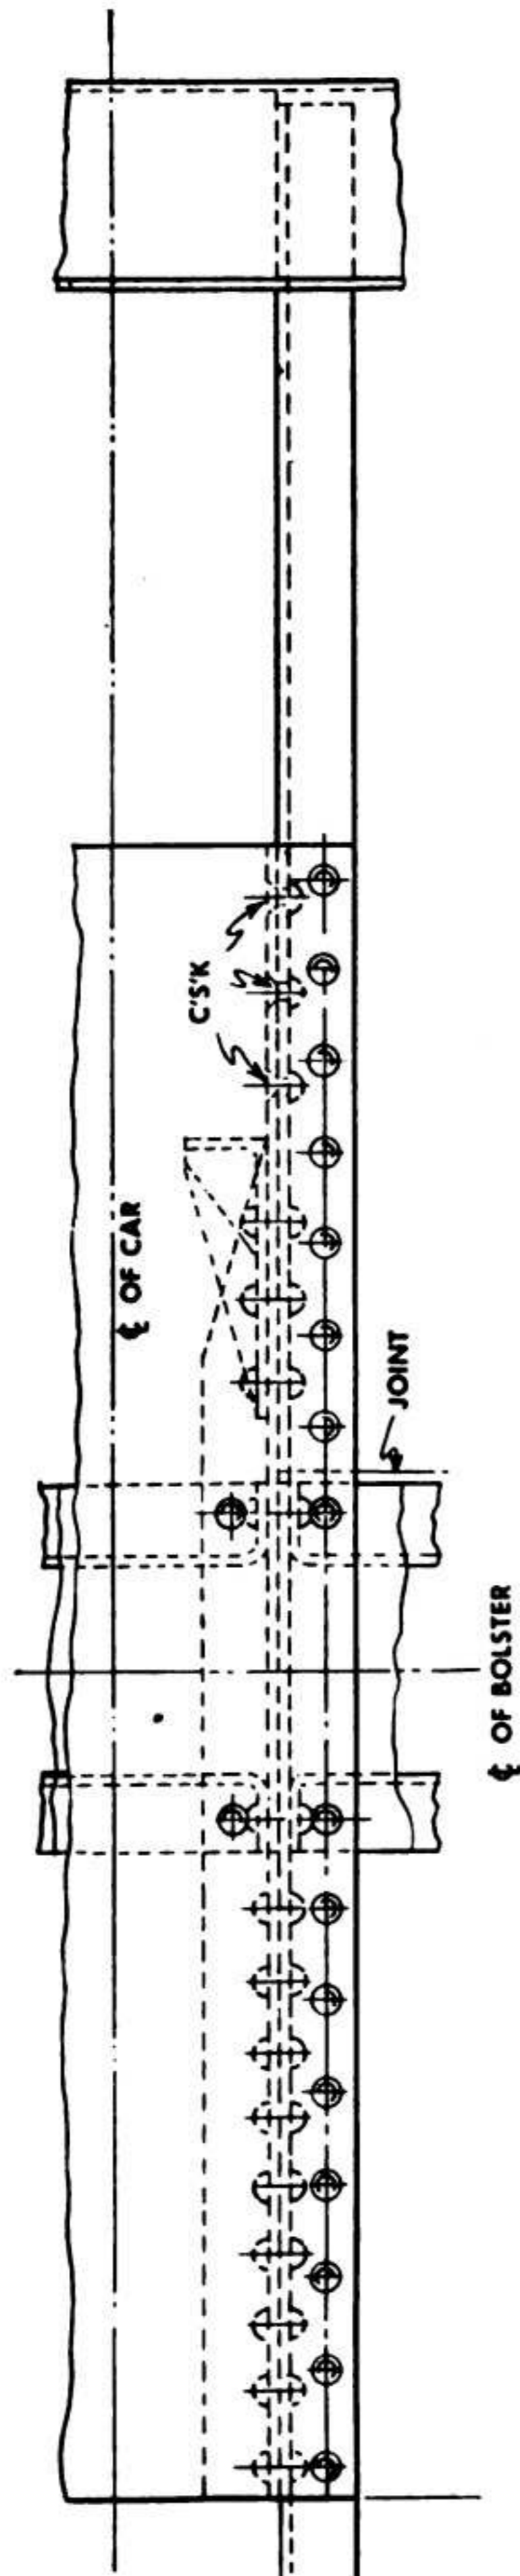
Steel center sill splice (inside) less than 8 inches from face of body bolster.
